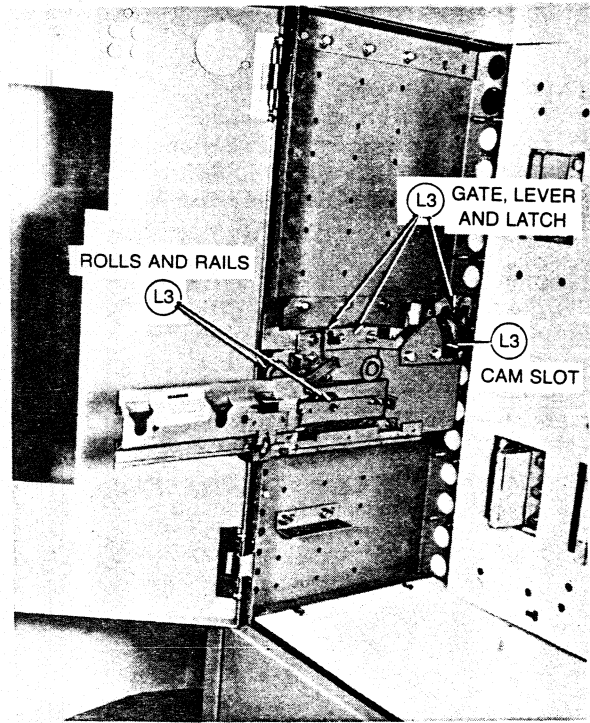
RAIL AND CAM ASSEMBLY—LEFT SIDE
